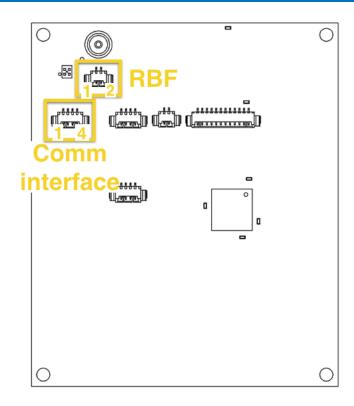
Remove Before Flight (RBF) Connector and Pinout – Bottom Side
